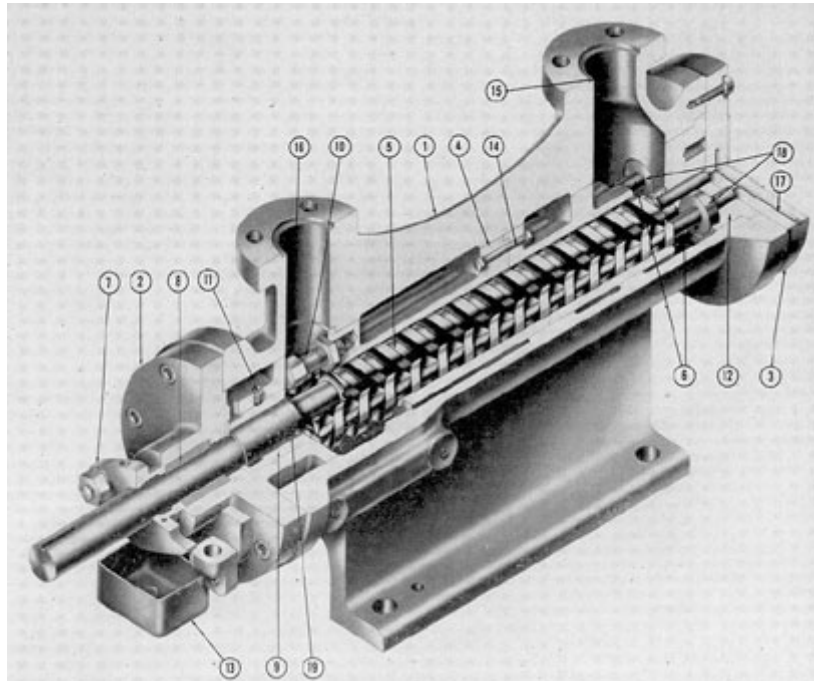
Cutaway of IMO pump. 1) Casing; 2) end cover; 3) end cover; 4) rotor housing; 5) power rotor; 6) idler rotors; 7) packing gland; 8) packing; 9) guide bushing; 10) adjusting bolts; 11) jam screw; 12) bearing block; 13) drip cup; 14) sleeve bolts; 15) suction port; 16) discharge port; 17) equalizing channel; 18) collars; 19) bearing journal.
